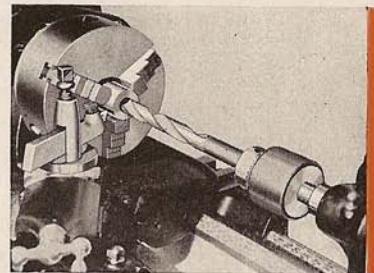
Drilling Hole in Bushing. Drilling of All Kinds Can be Handled.
